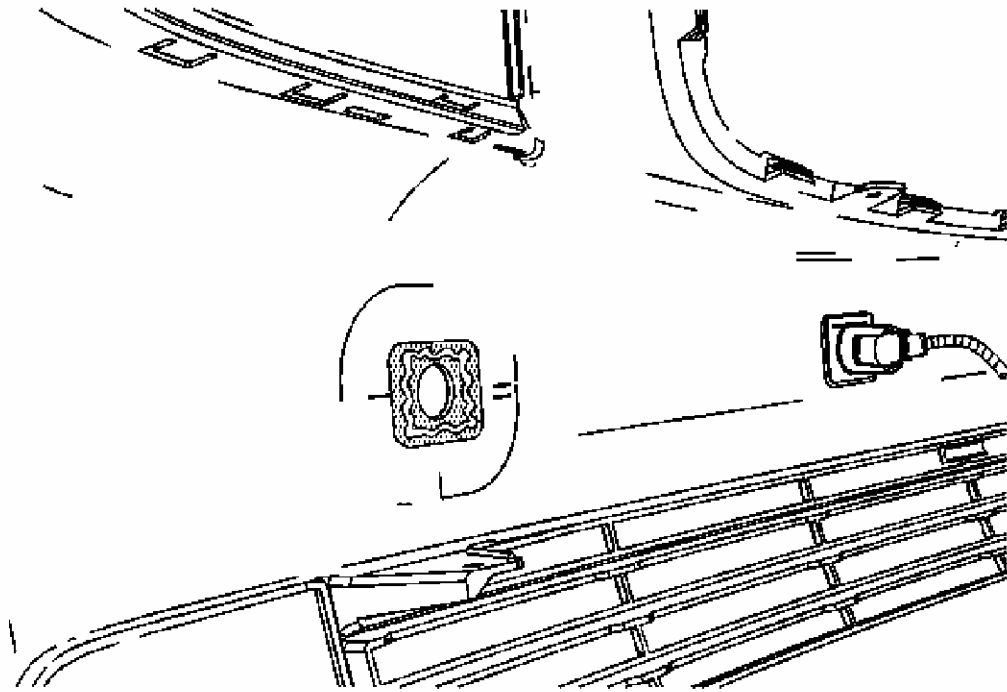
Sanding/Grinding Sonic Weld Plastic Residue From Fascia
